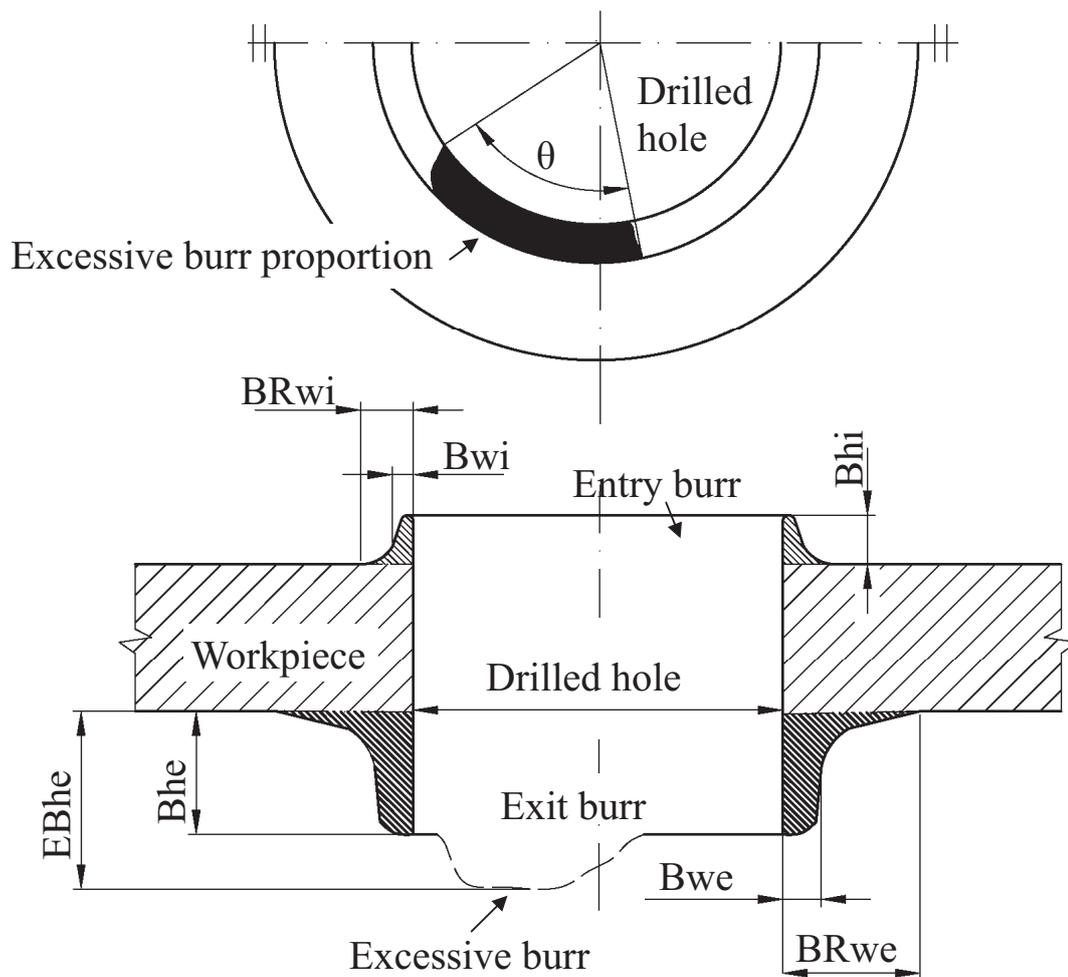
Description of measured burr geometry, where: Bhe — exit burr height, Bhi — entry burr height, $BRwe$ — exit burr root width, $BRwi$ — entry burr root width, Bwe — exit burr width, Bwi — entry burr width, $EBhe$ — Excessive burr height, θ — an angular proportion of an excessive burr.
